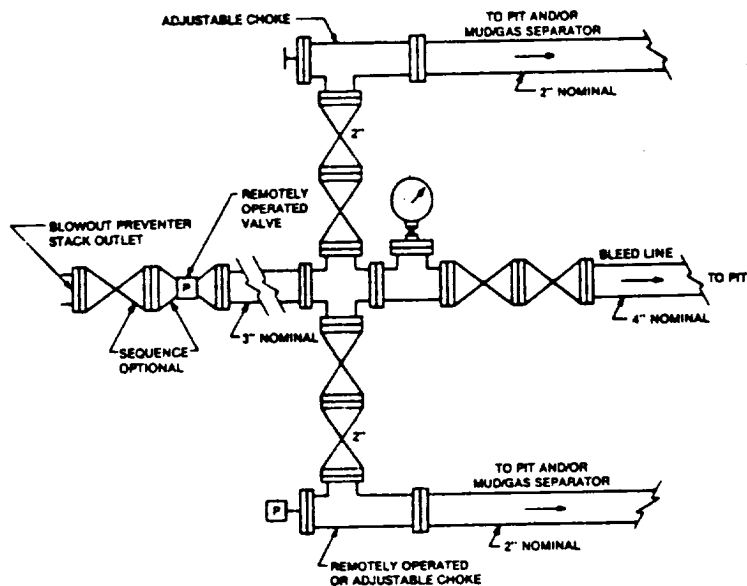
Typical choke manifold assembly for 5M rated working pressure service — surface installation.
